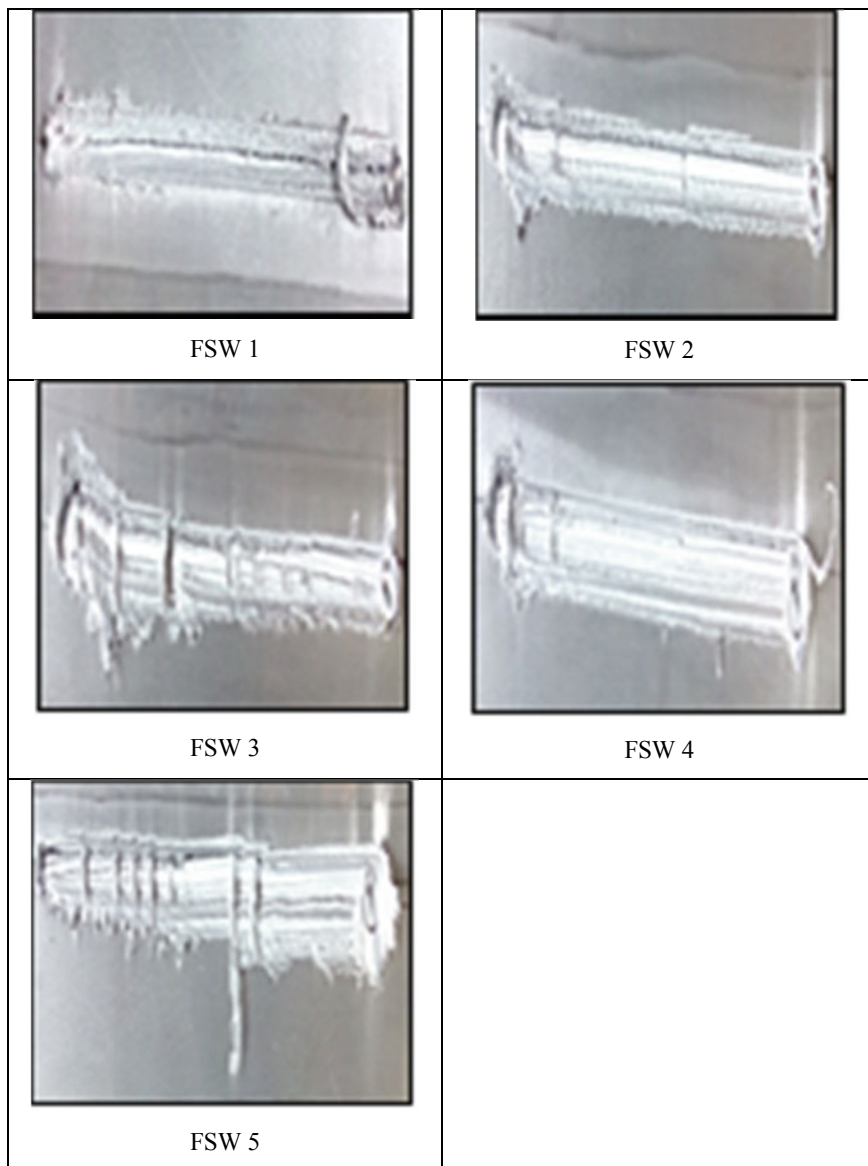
Visual inspection on weld surface for FSW 1-5
